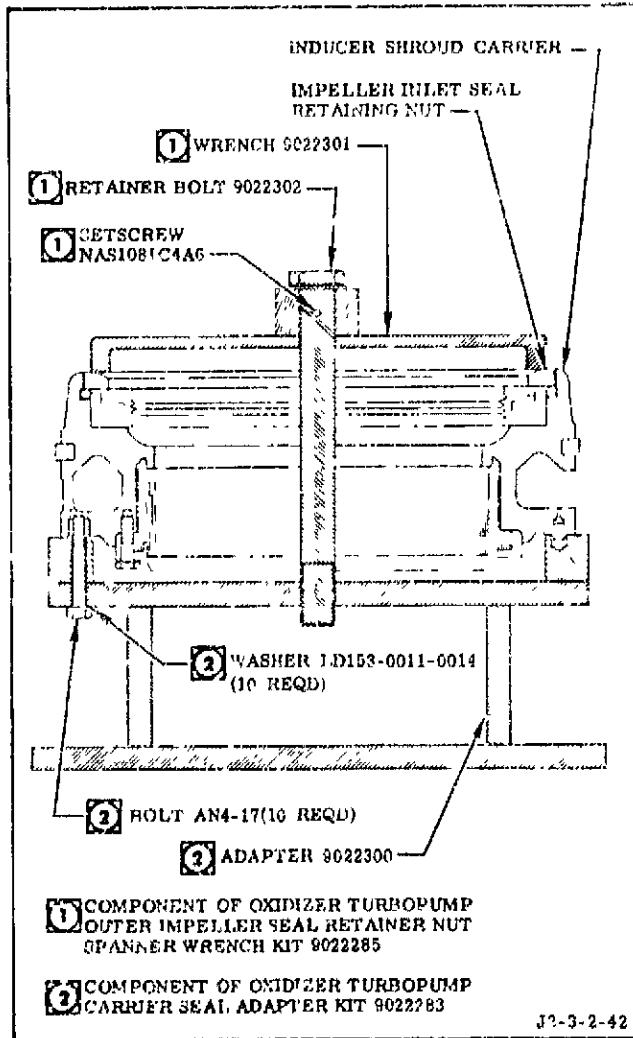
OSE Setup for Impeller Inlet Seal Retaining Nut
